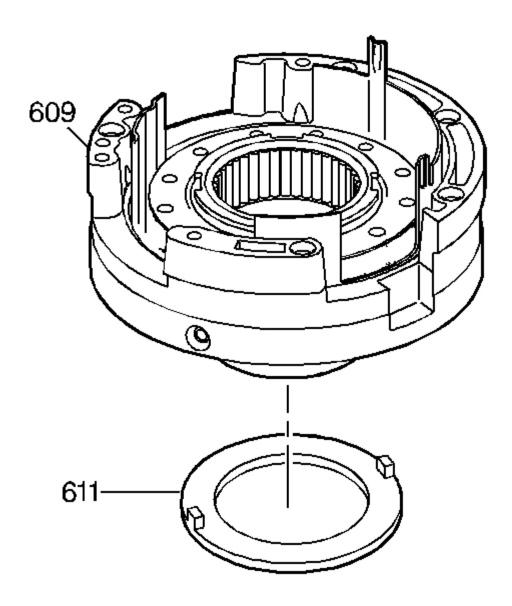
View Of Second Clutch Housing Thrust Washer Courtesy of GENERAL MOTORS CORP.
